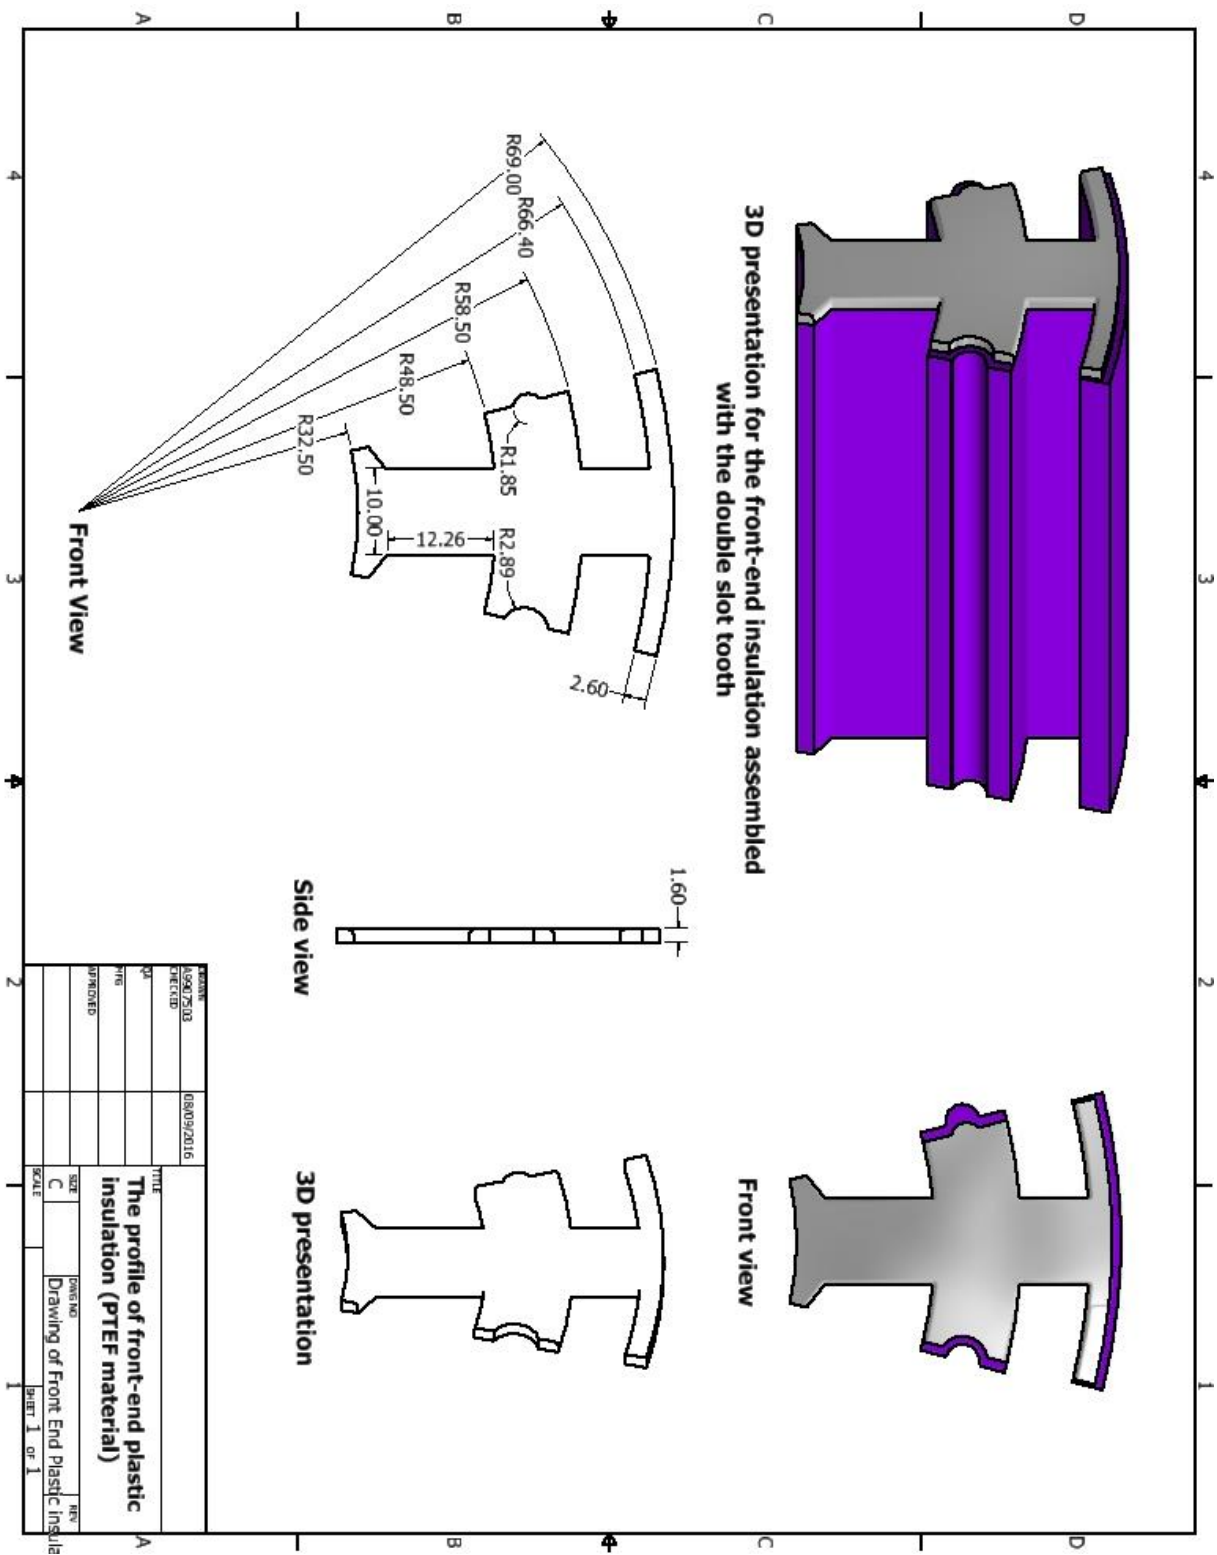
Drawings of front-end plastic insulation for the stator teeth
